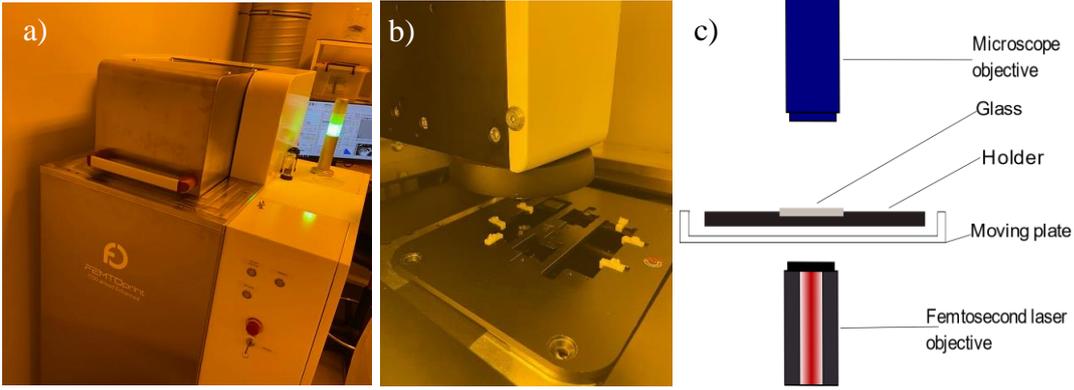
Picture of the Femtoprint: external view of the machine (a), inner view on the microscope and holder (b) and schematic explaining the inscription part (c).
